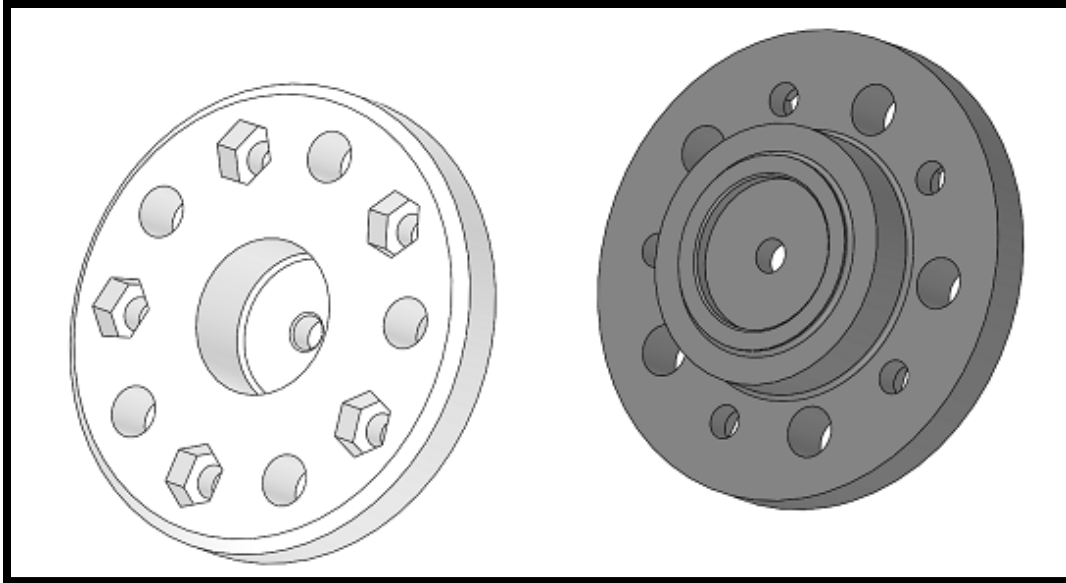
Top View (left) and Bottom View (right) of NPSMF to Shaft Coupling Piece.
